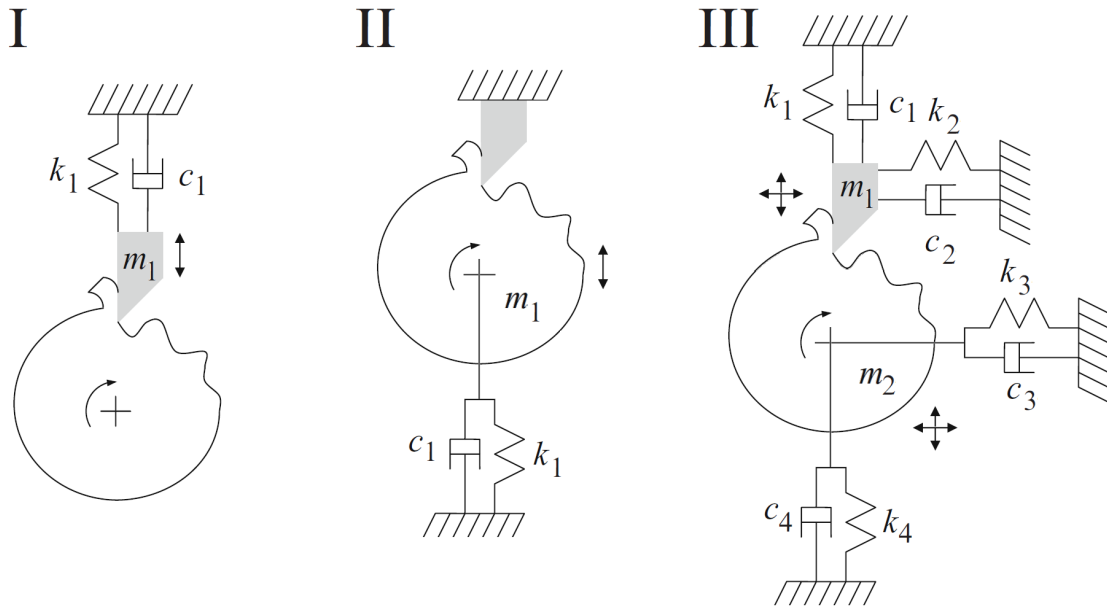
Primary chatter mechanism for (I) SDoF flexible tool and rigid workpiece, (II) rigid tool and SDoF flexible workpiece, (III) 2DoF flexible tool and workpiece
